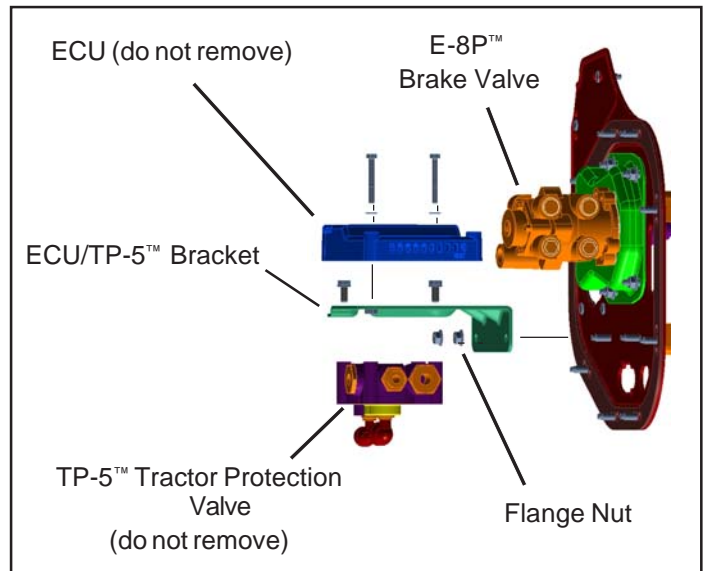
(Type C) Bracket with ECU and TP-5™ Tractor Protection Valve
